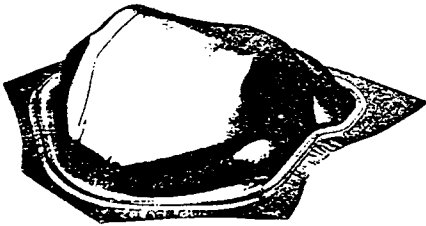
A wheel house inner panel obtained by hydraulic counter-pressure forming.
